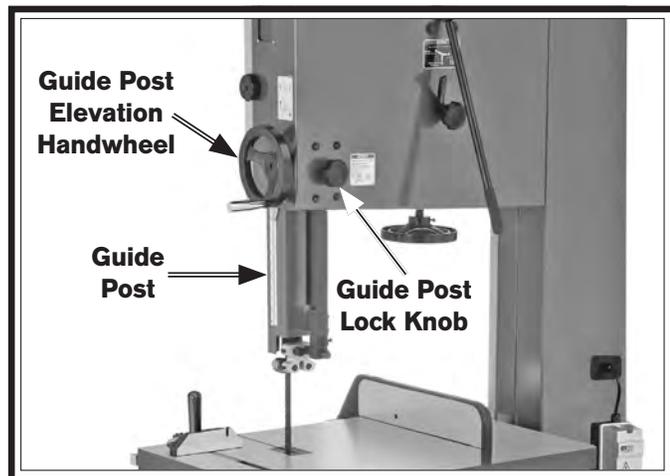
Location of guide post, elevation handwheel, and lock knob.
